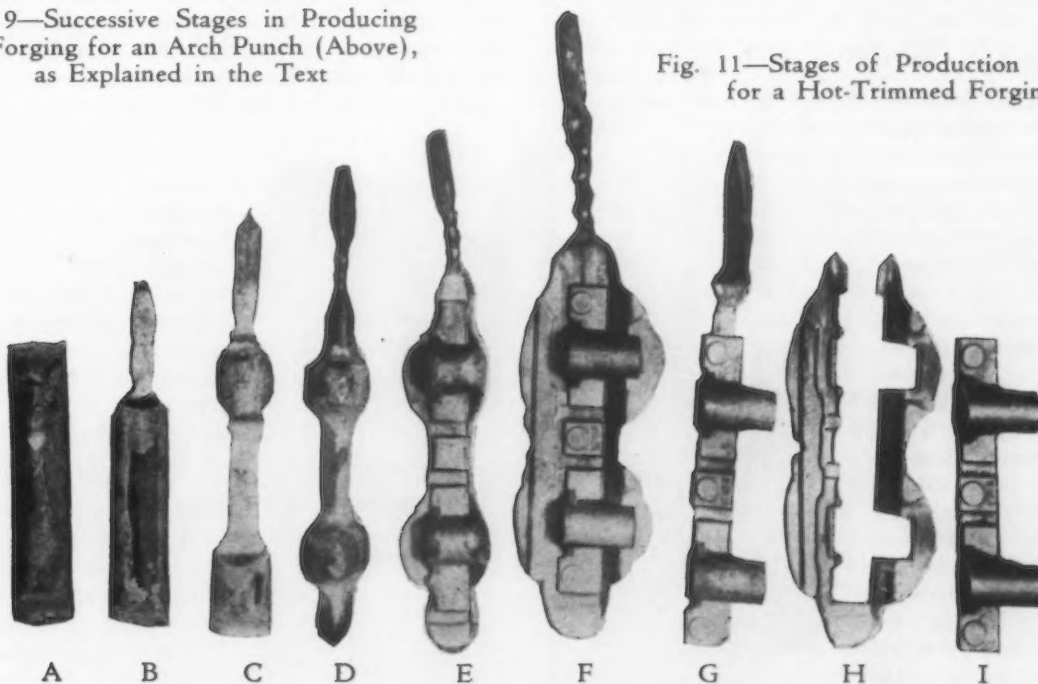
Stages of Production (Below) for a Hot-Trimmed Forging
